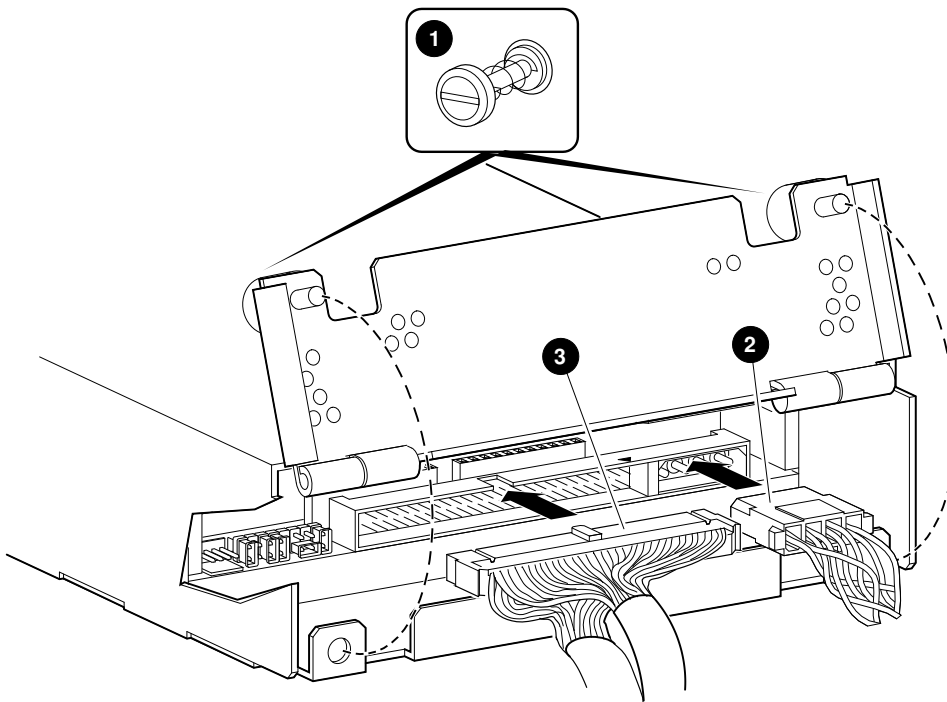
Sliding the Device into Enclosure and Mounting to Front Cover
